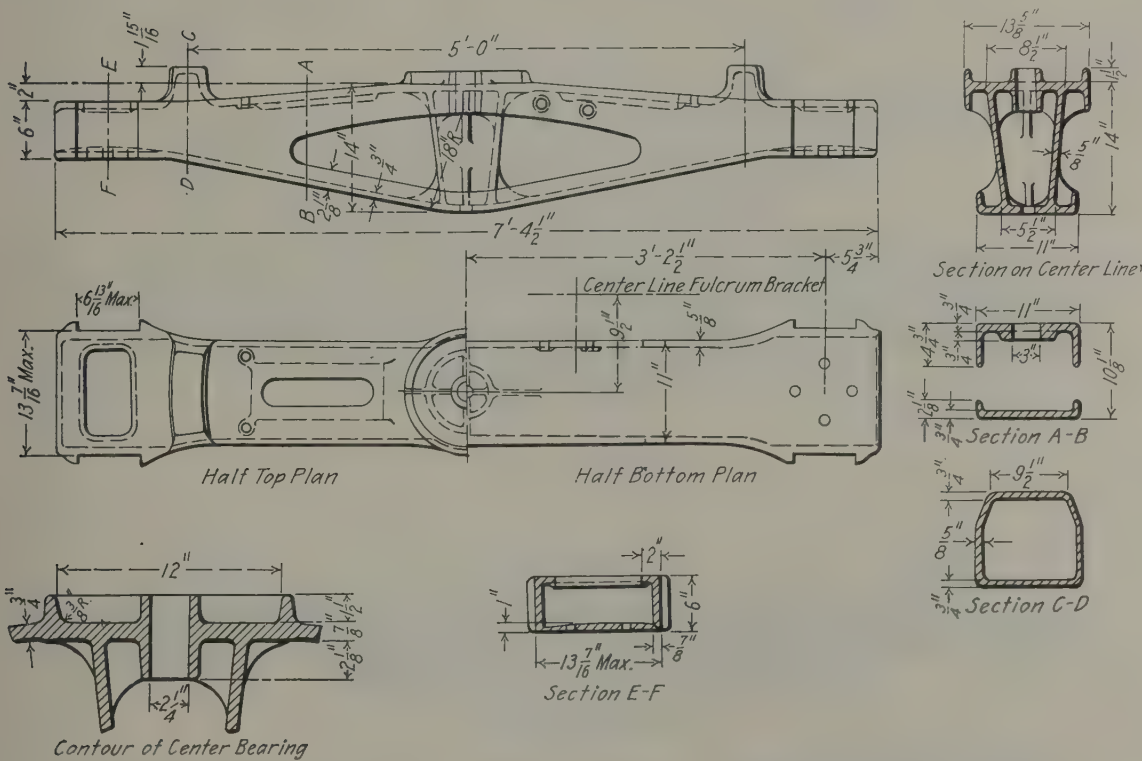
Truck Bolster for 50-Ton Capacity Freight Cars. Buckeye Steel Castings Company.
